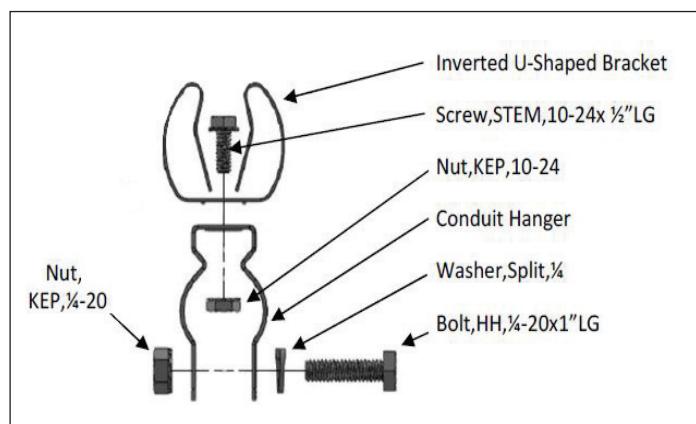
Inverted U-Shaped Lamp Support Bracket (EXPLODED VIEW))
